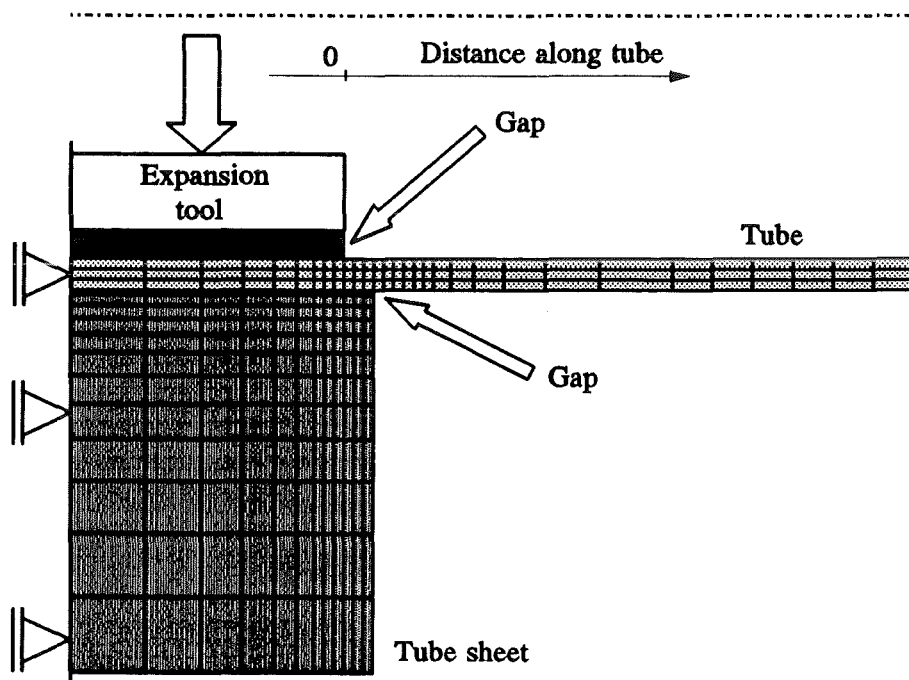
Model of the tube to tube-sheet joint (coarse mesh)
